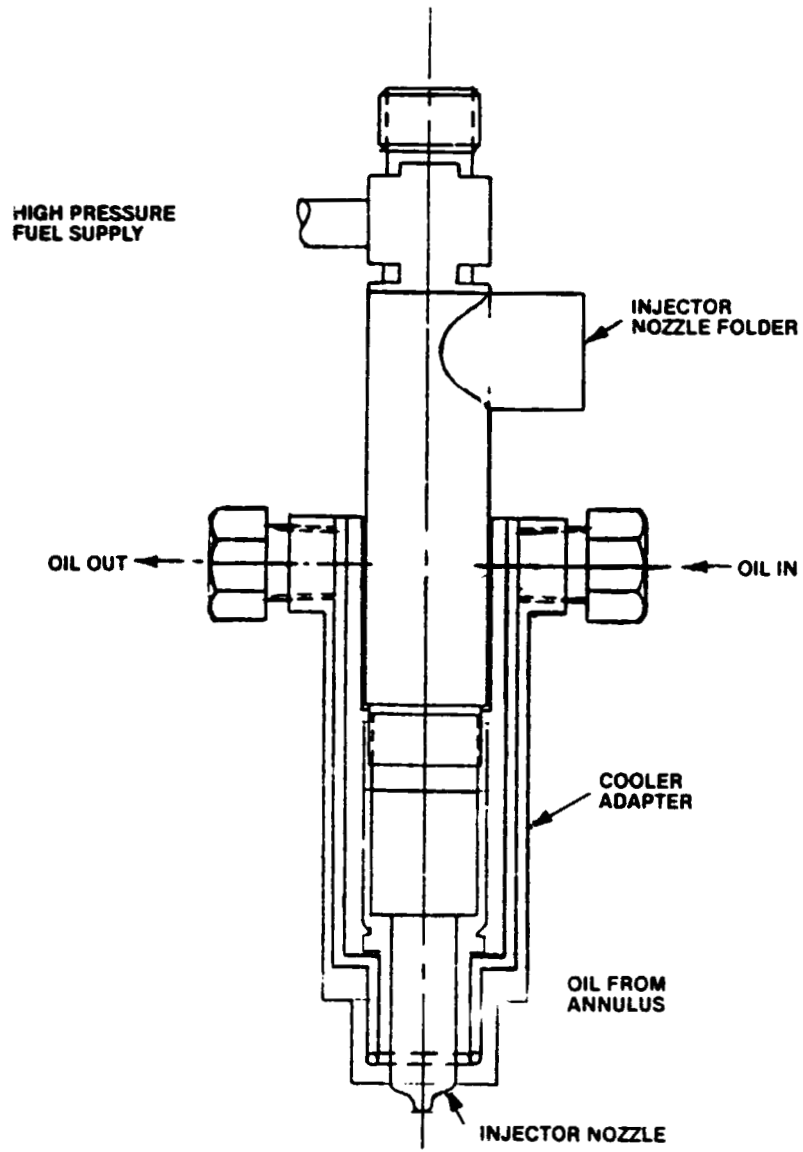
Cooled Injection Nozzle Holder and Adapter
